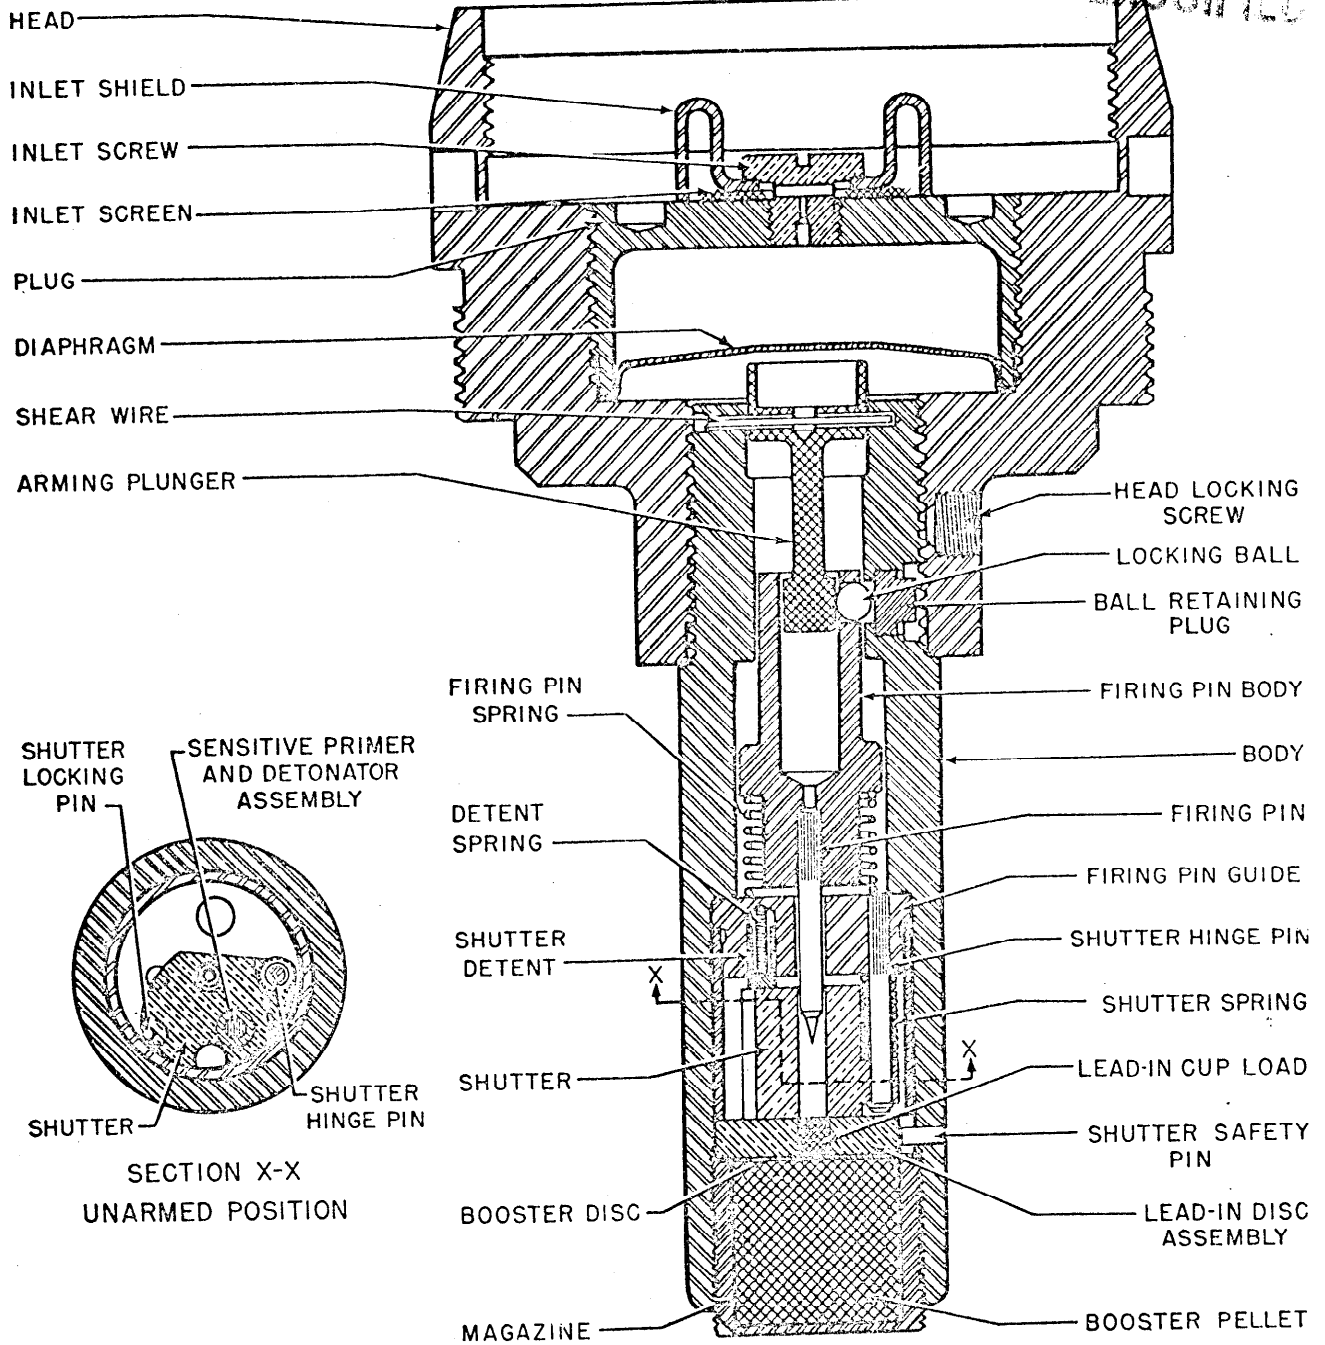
Base Fuze Mk 161, Cross Section View, Unarmed Position.
